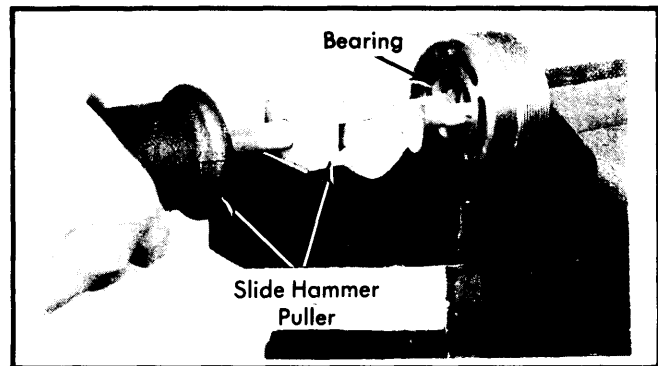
Removing Worm Shaft Bearing Race on Sector Shaft Gear
